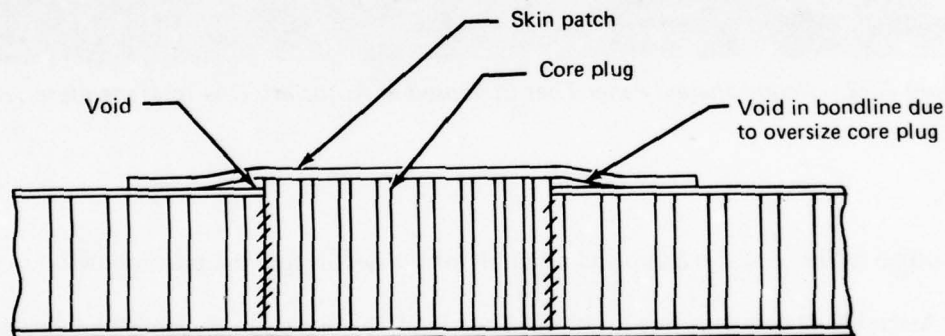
Voids Under Metal Patch Plate Due To Improper Fit of Details
